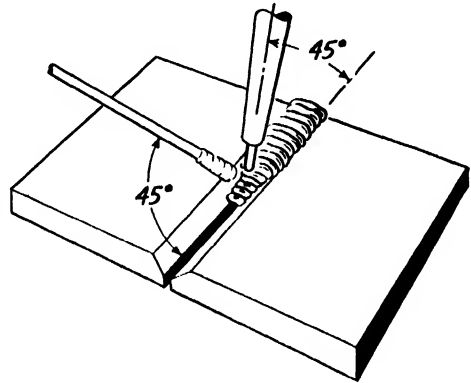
In welding cast iron, use a cast-iron filler rod and a cast-iron flux. Keep the bottom and the edges of the groove well fused with the puddle.
